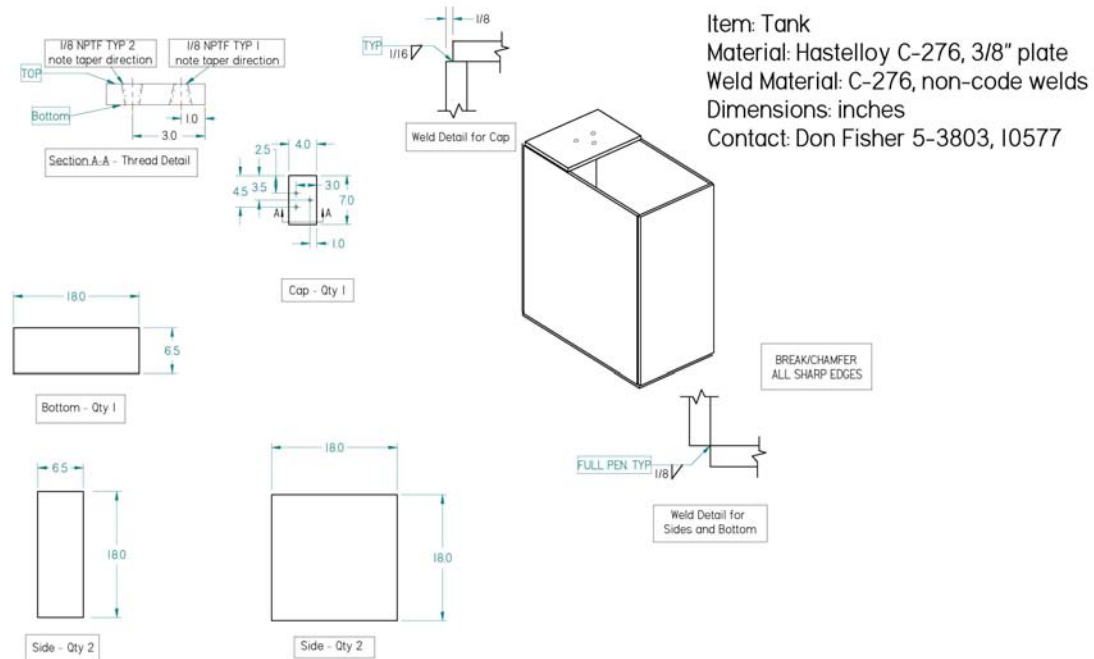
Construction drawing for the Hastelloy (Alloy C-276) immersion tank.
